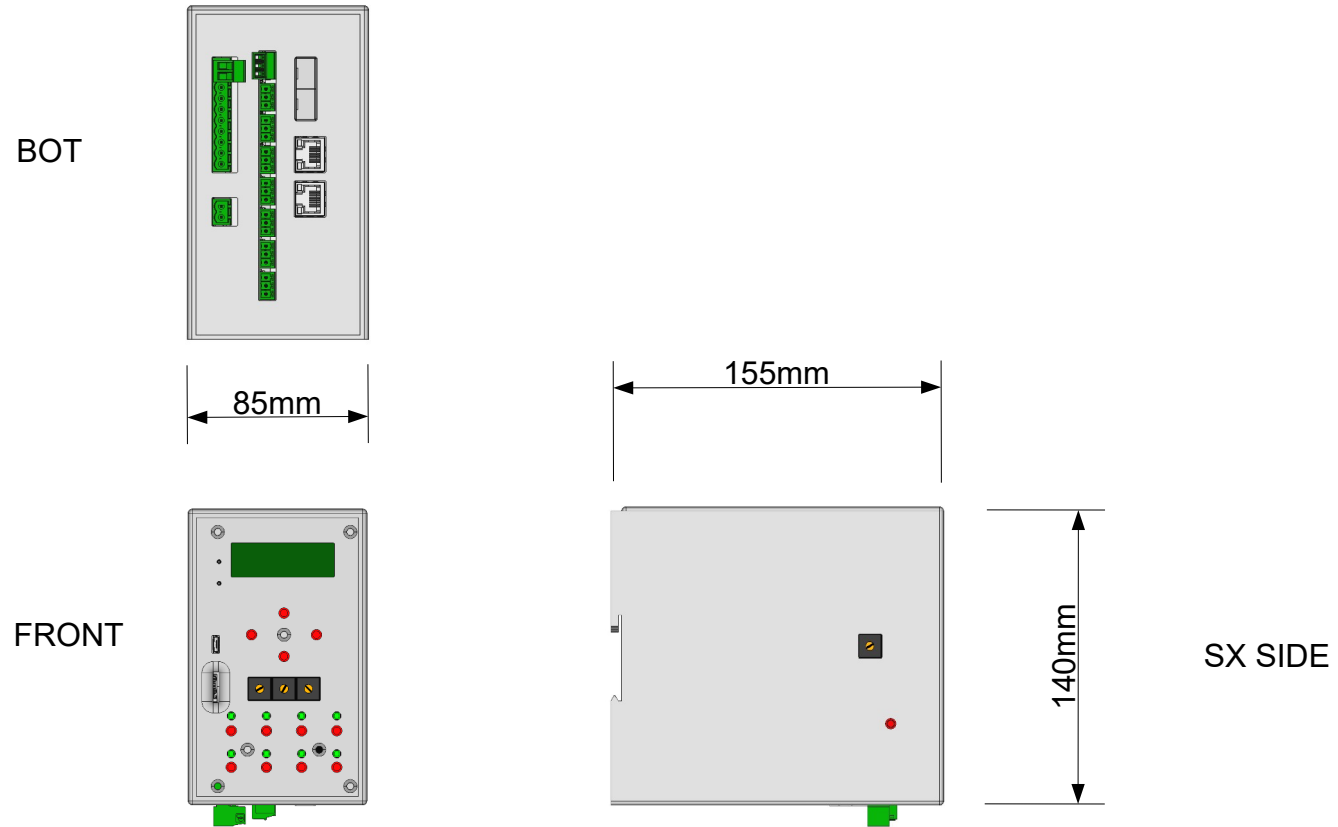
Dimensions (mm) / Dimensioni (mm)
